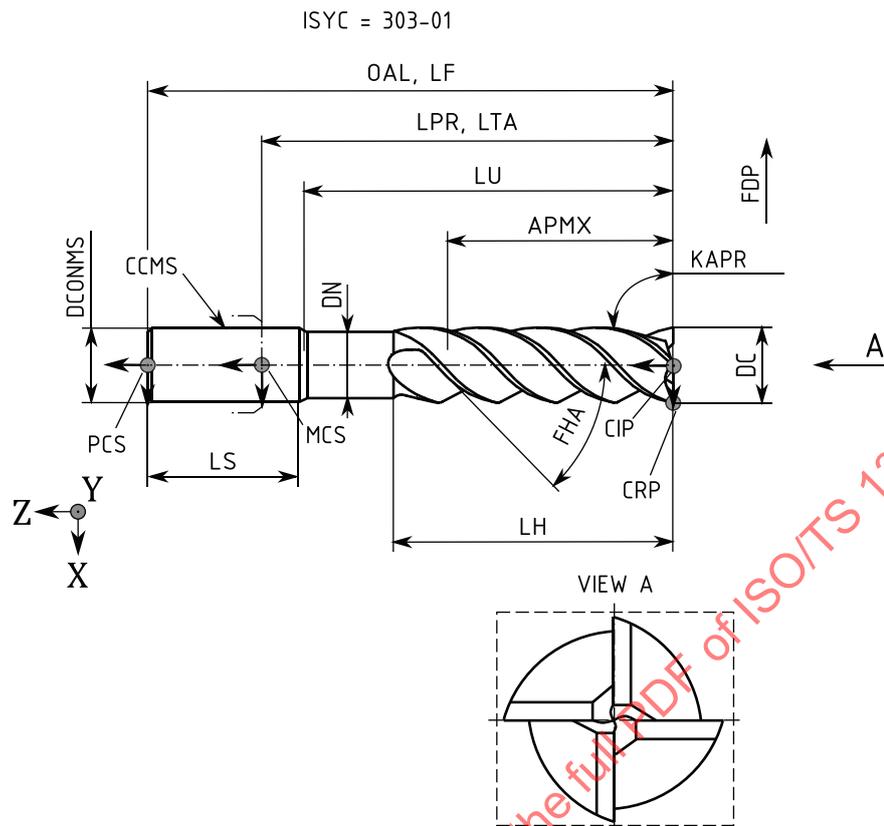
ISYC 303-01 - Non-centre cutting end mill, solid
